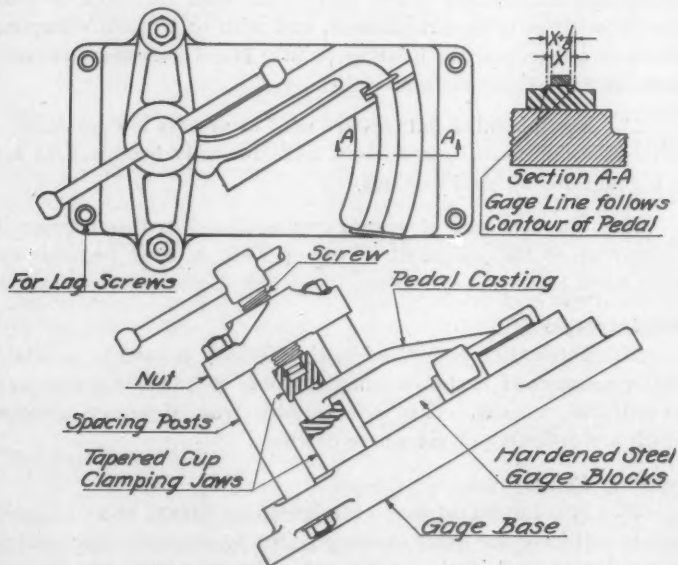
CLUTCH OR BRAKE PEDAL STRAIGHTENING GAGE.
